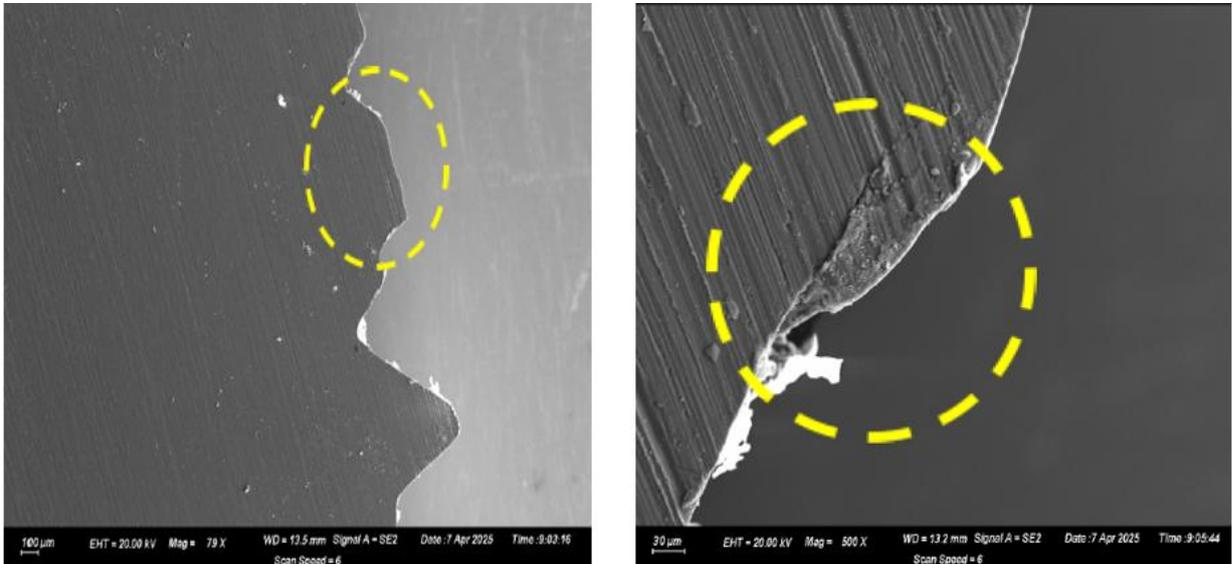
Cylinder threads side view (Photo 7 stereo).
